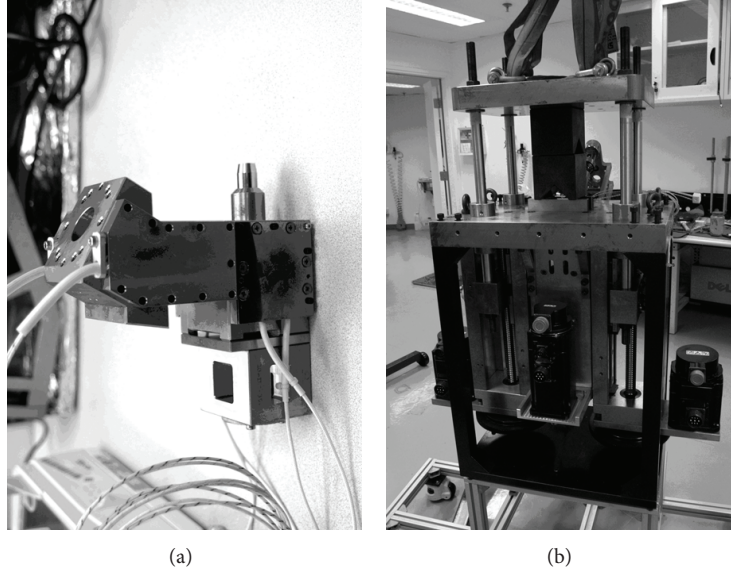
(a) Injection part. (b) Micro injection molding machine.
